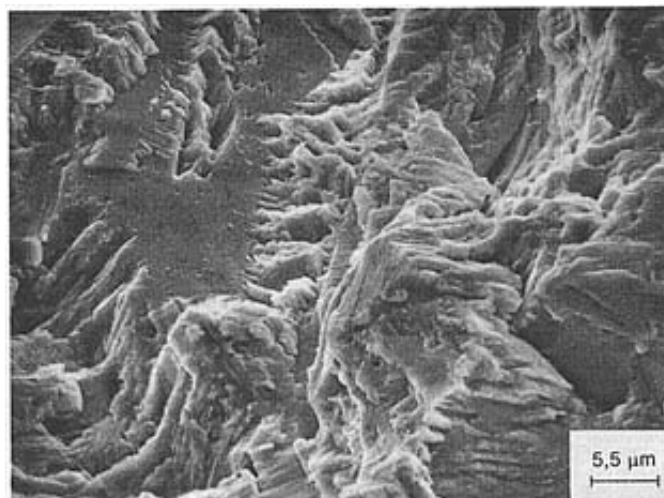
Corrosion cracks by corrosion fatigue (SEM picture)
